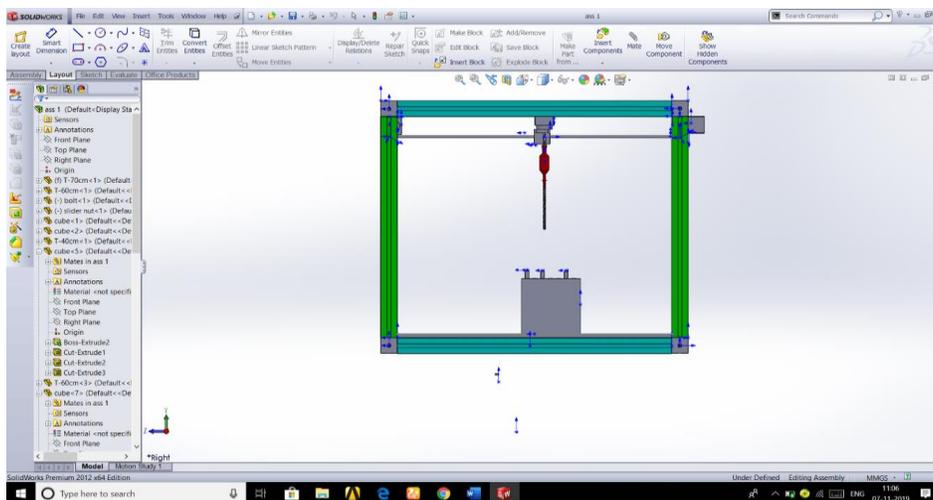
This is the front view of the machine. We can clearly see the Z axis motor mount which is fixed on the Z axis, test tubes in the test tube Holder
